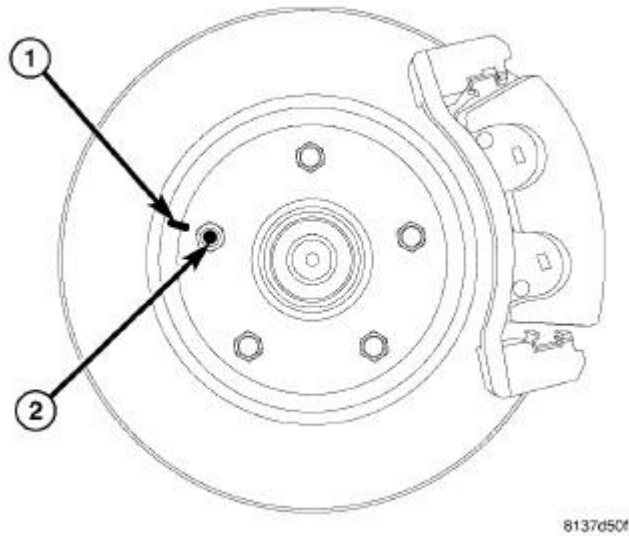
WHEEL STUD AND ROTOR INDEX MARKED
